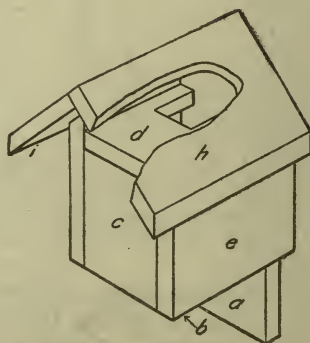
House for wrens and house finches. Roof broken to show interior.
